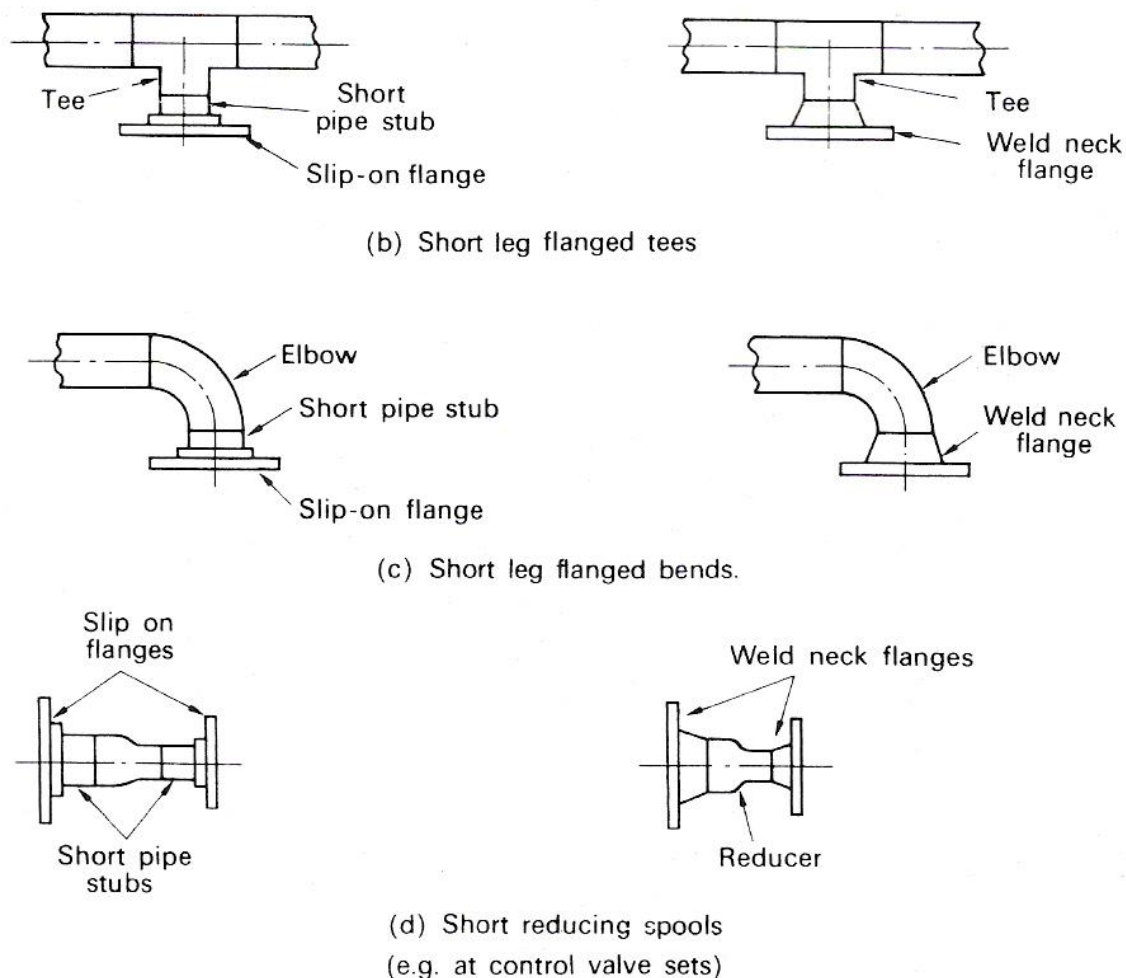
Use of Fitting-to-Fitting Connection to Reduce Fabrication Cost
